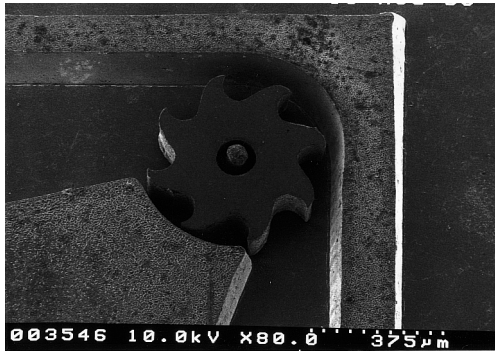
Assembled prototype microturbine, fabricated using process shown in Fig. 1
